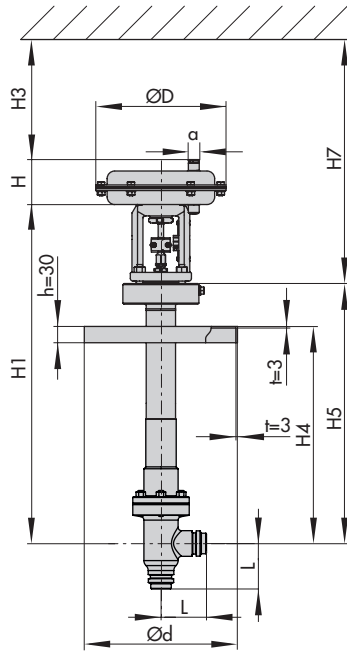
Type 3248-1 Angle Valve with aluminum body
